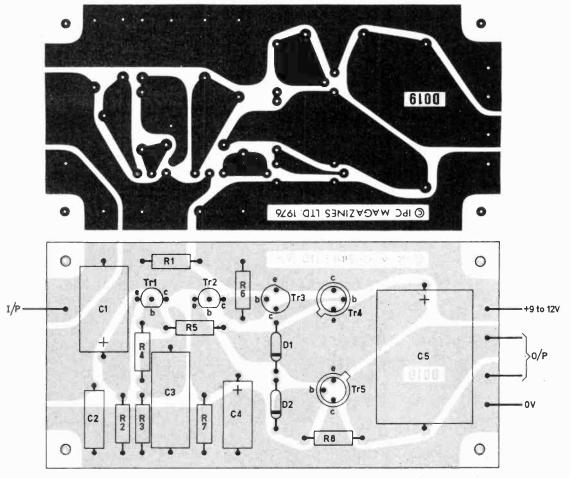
Drawing of both the foil and component side of the PCB designed for this project.
